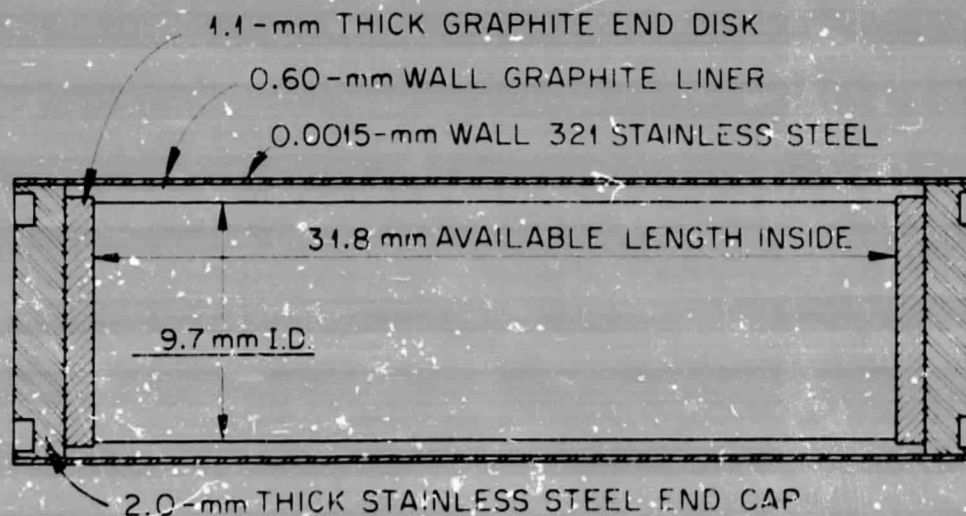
Stainless Steel - Graphite ampoule assembly for A and A-R type specimen capsules.
